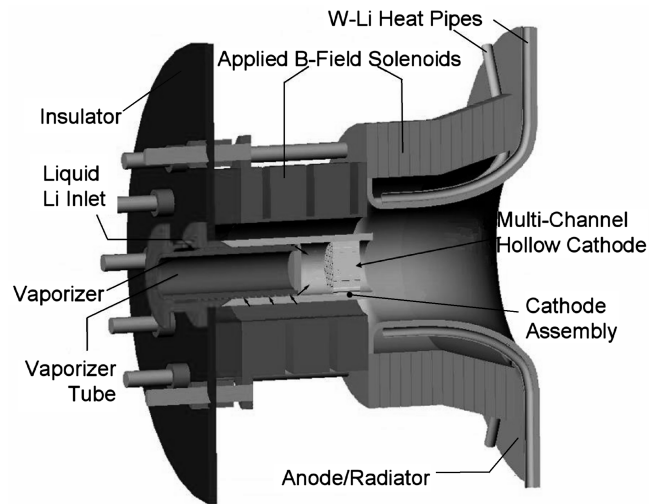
Cutaway drawing of the conceptual ALFA² thruster showing major components.
